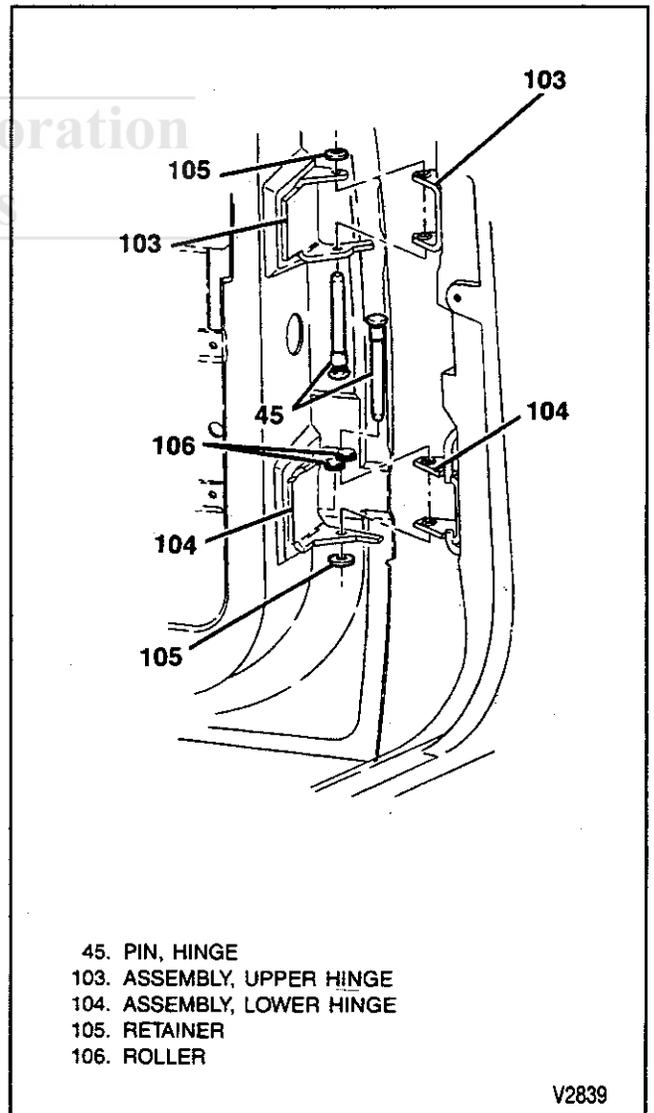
Rear Side Doors and Cargo Door Hinge Components
